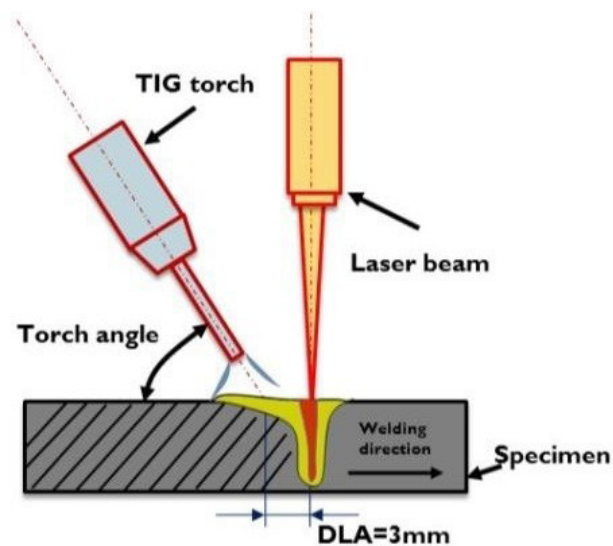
Fiber laser -TIG hybrid welding system [156].
